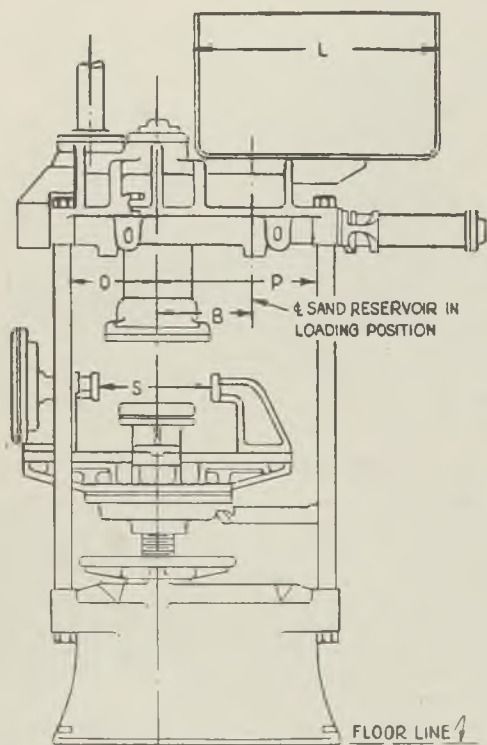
TYPICAL DESIGN OF CORE-BLOWING MACHINE.
